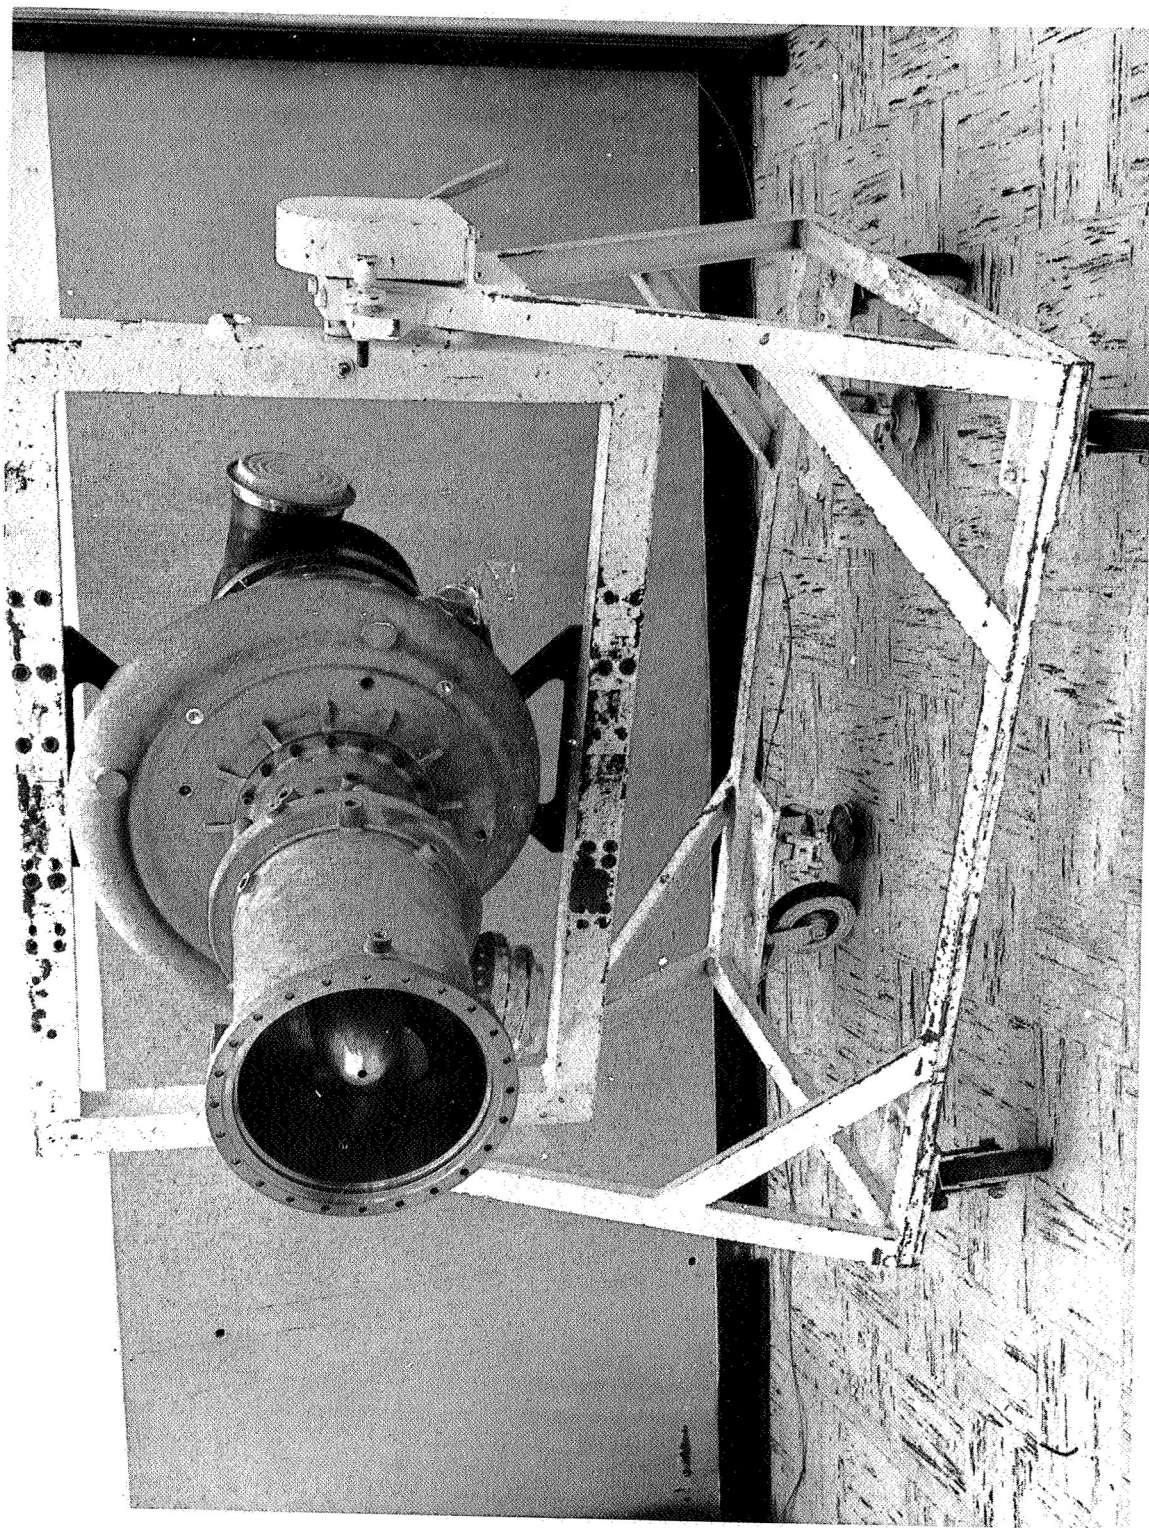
View of Turbopump Assembly in Build-Up Stand.
